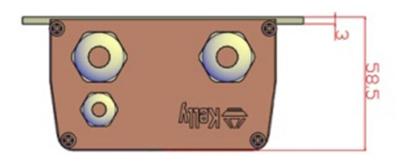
KLS7230S mounting holes' dimensions (dimensions in millimeters)
